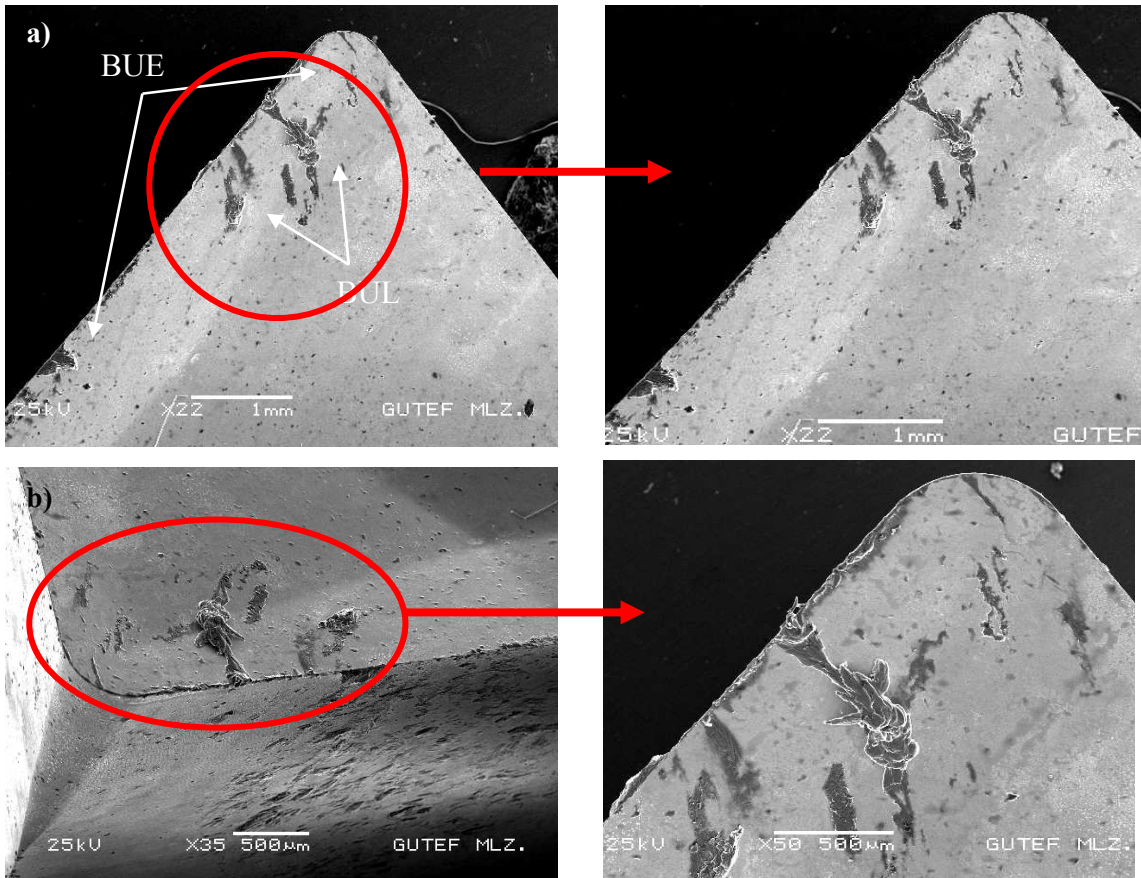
BUE and BUL image of machining AA2014 (T4) alloys at 400 m/min cutting speed and 0.30 mm/rev feed rate a) SEM image of tool rake face, b) 3D SEM image of the cutting tool
